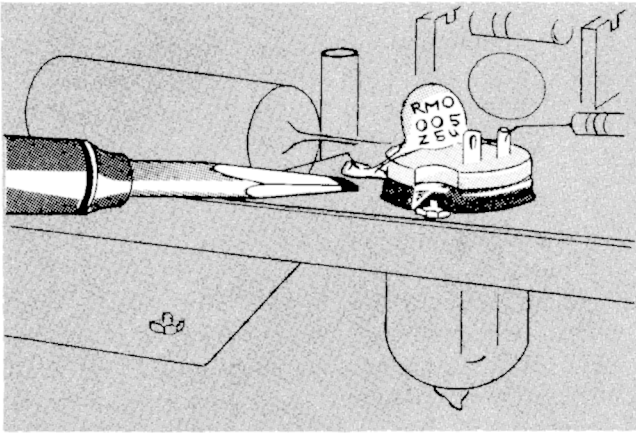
Soldering to a terminal. Note the slight fillet of solder--exaggerated for clarity--formed around the wire.
